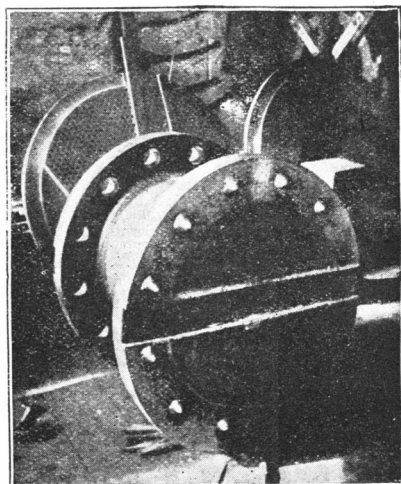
THE NEW SECTION OF SHAFT, SHOWING THE KEYWAY AND BOLT HOLES.
